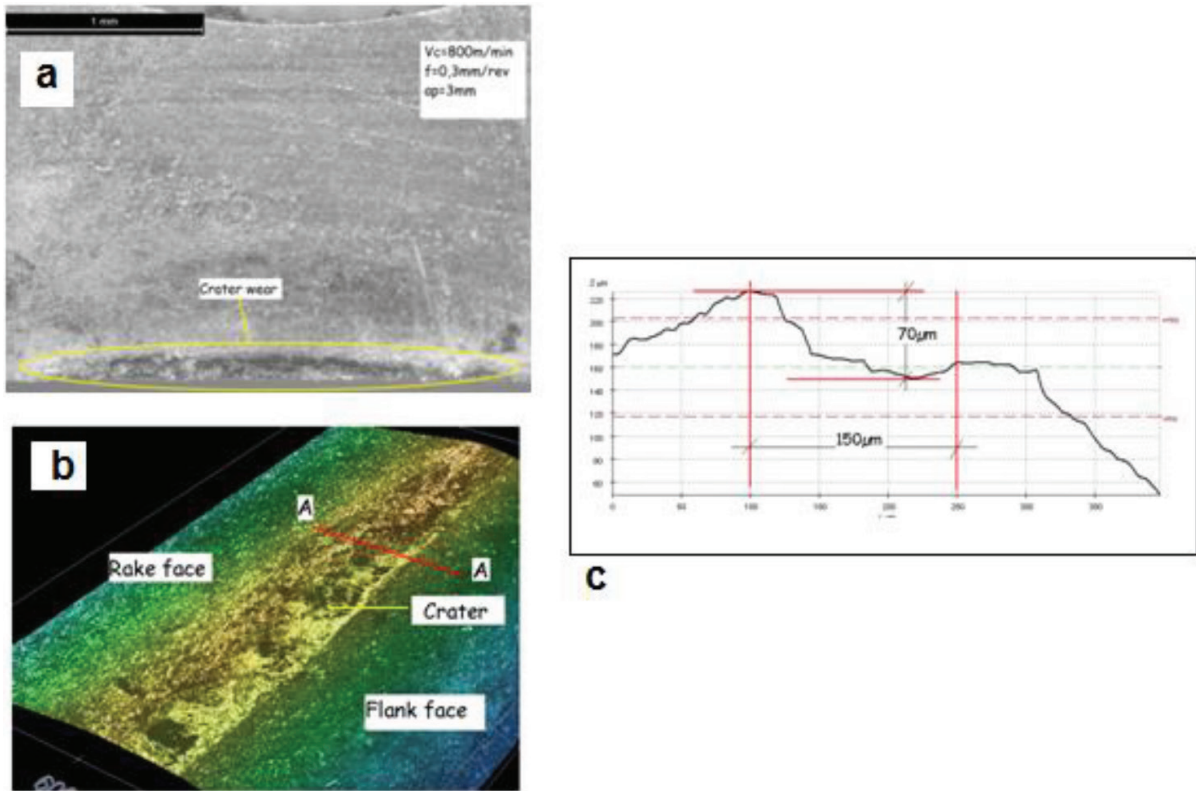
(a) Photography of cutting edge insert (b) 3D confocal image of the cutting insert according the cutting parameters (800 m/min, $f = 0.1$ mm/rev, $a_p = 3$ mm), (c) crater profile by skew right A.A.
